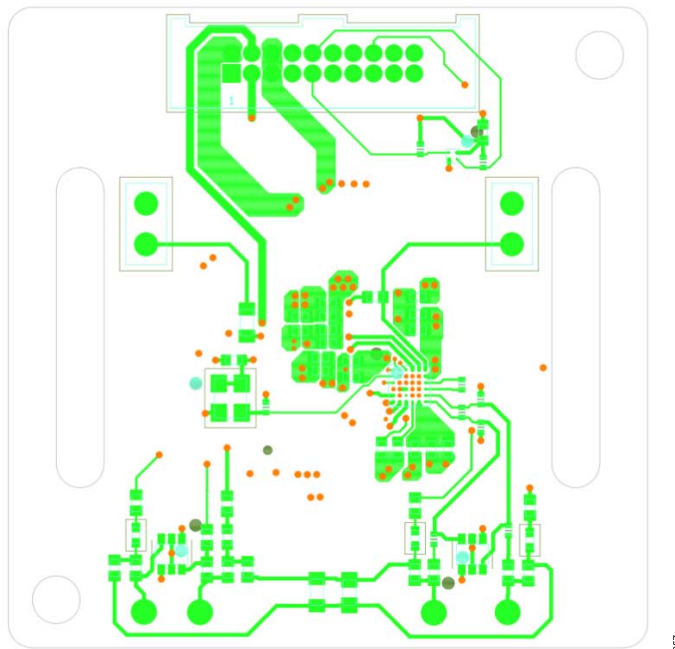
EVAL-ADPD6000Z PCB Layout: Top
